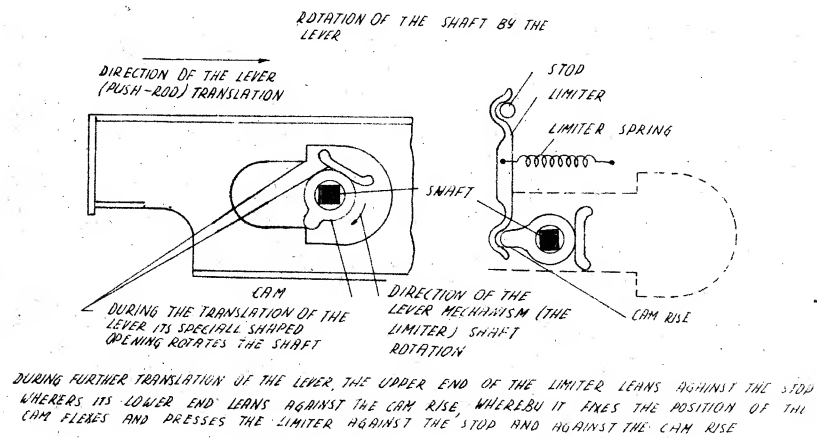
14. Diagram of the cam positioning of the lever (push rod) mechanism while tuning.
